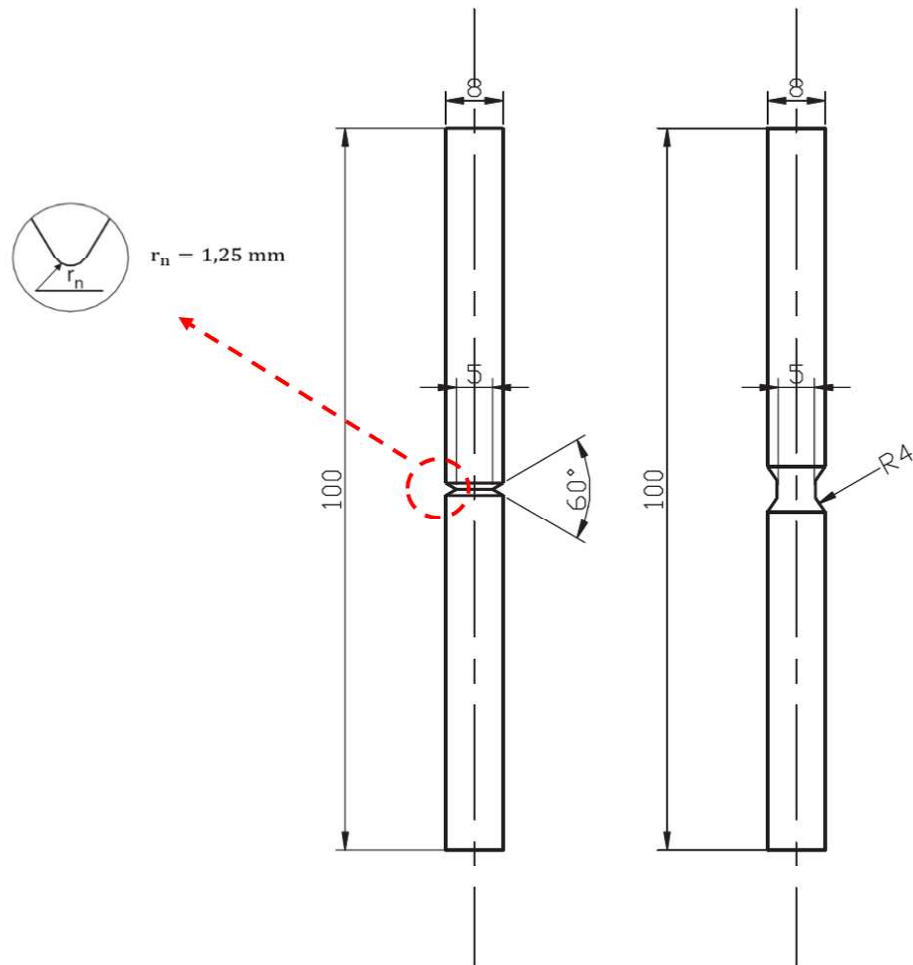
En3B notched shaft specimen geometries and dimensions [1]. All dimensions are given in mm.
